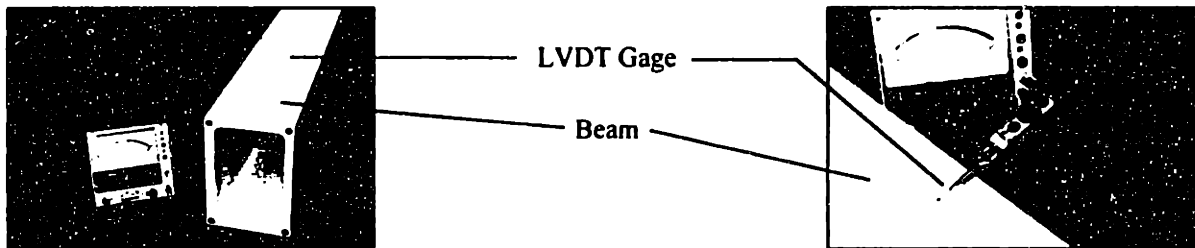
Photographs of the LVDT gage head being used to measure parallelism between two surfaces.
